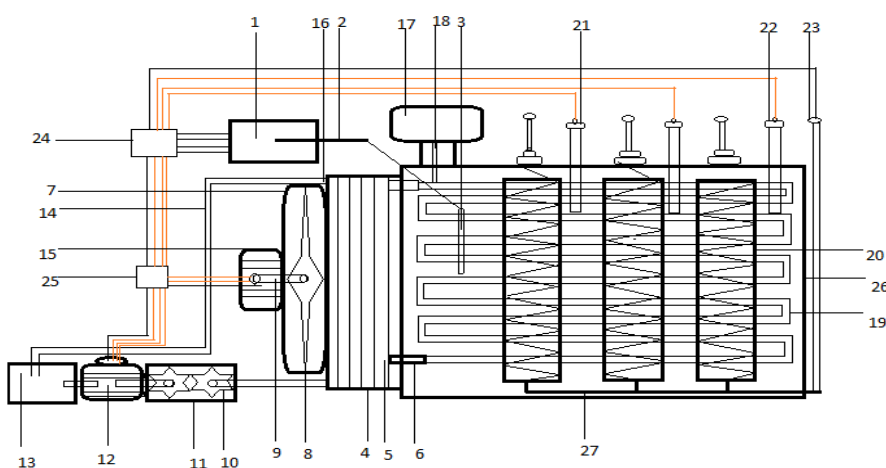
Construction drawing of transformer fire and explosion protection device
